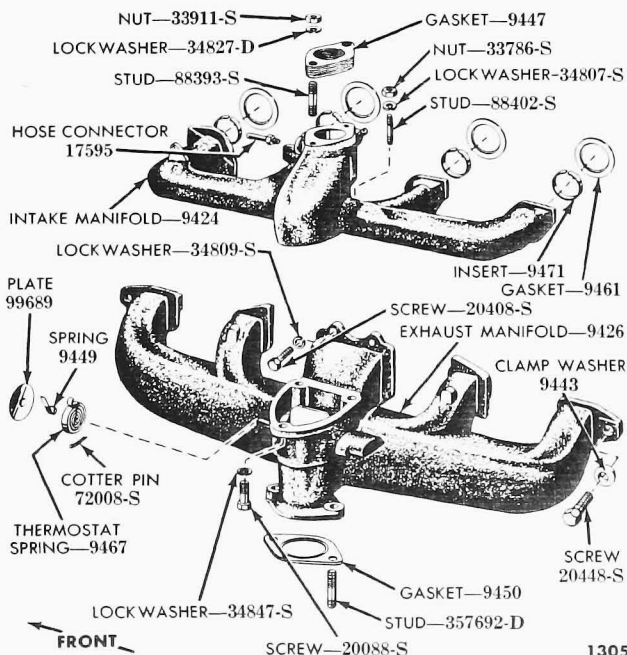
Manifolds (Parcel Delivery) Disassembled
